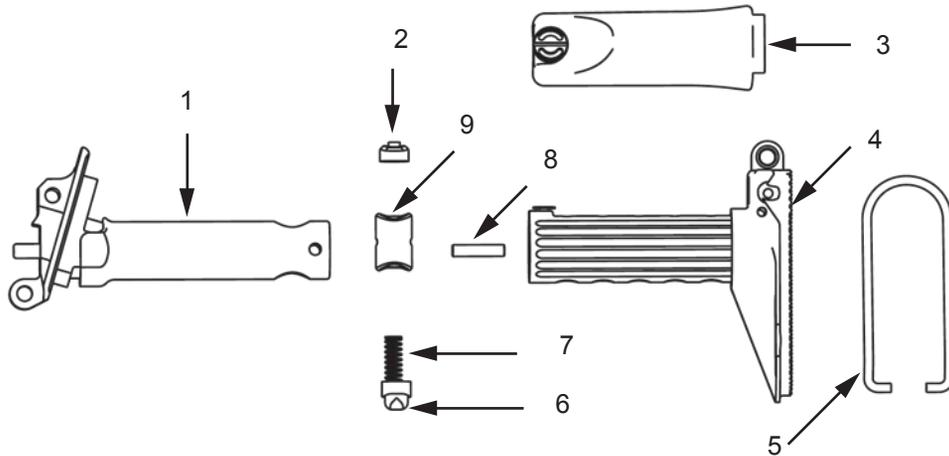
Lightweight Collapsible Buttstock Disassembly.
